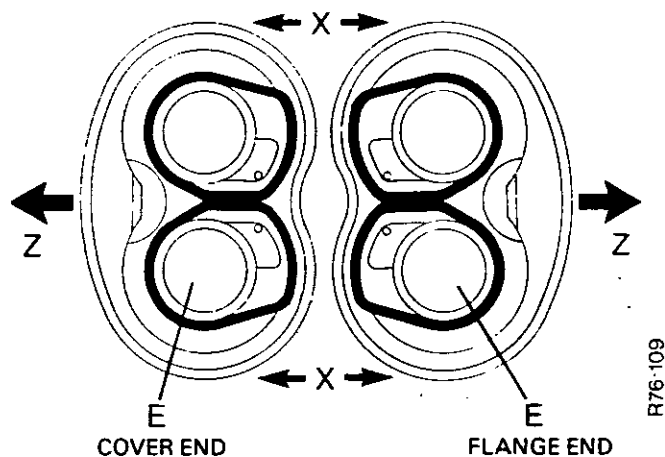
ASSEMBLY OF THE PUMP BEARINGS AND SEALS
